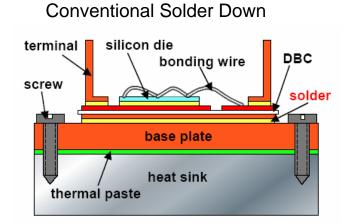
Cut through a conventional power module with base plate (housing not shown)
